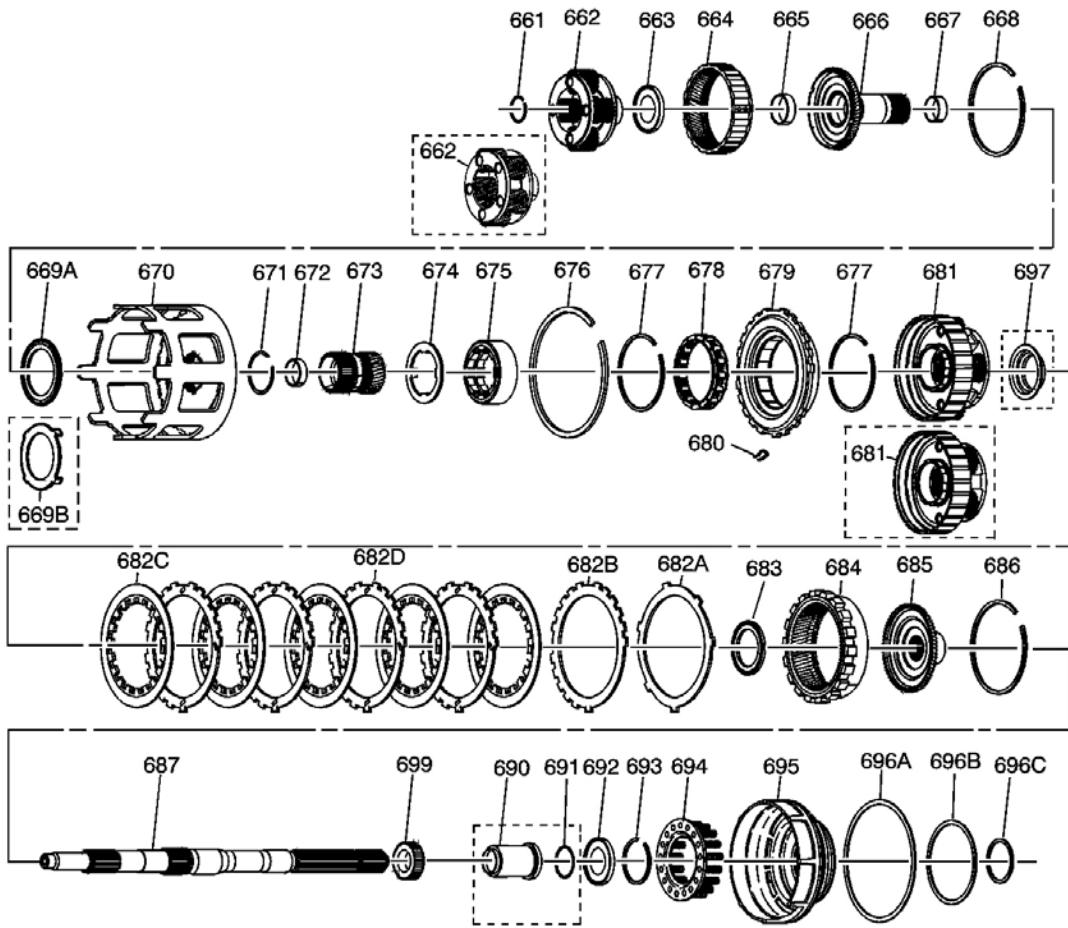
Internal Parts Disassembled View (2 Of 2)
